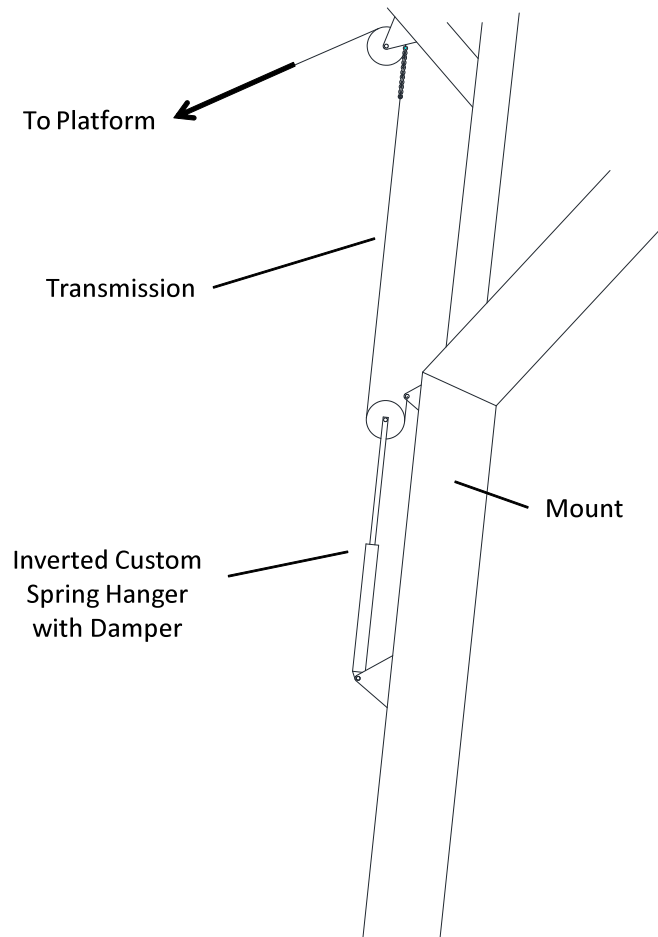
Example for a mechanical back-up of the platform moving mechanism (lateral view from right showing a part of the mount portico).
